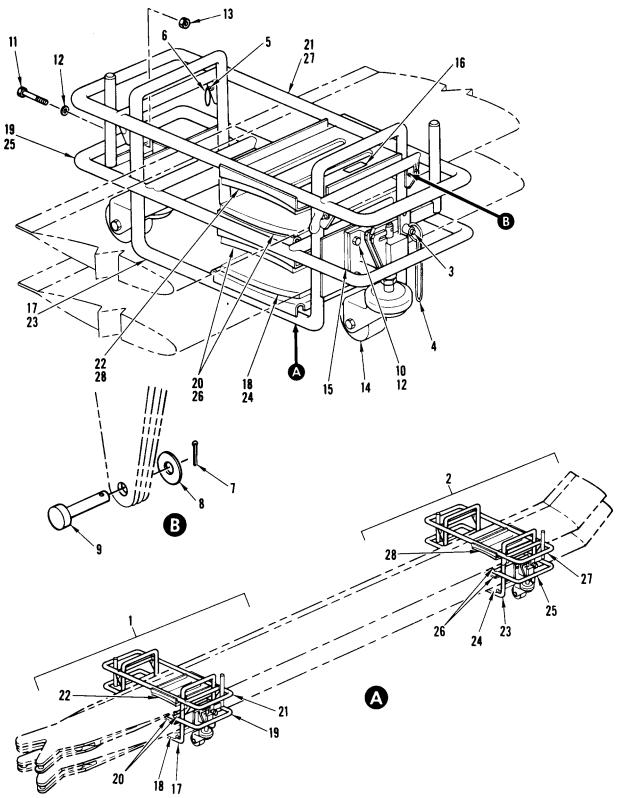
GROUP 80 SPECIAL TOOLS MAIN ROTOR BLADE RACK SET
